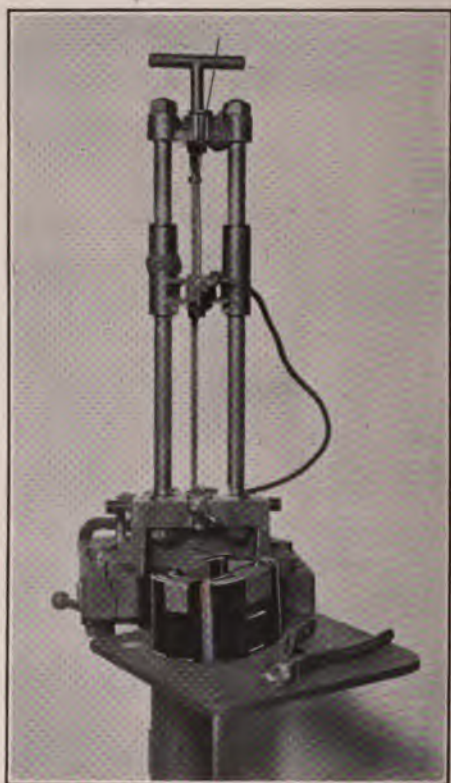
Electro percussive welding. Machine welding leading in wire on field coil.
